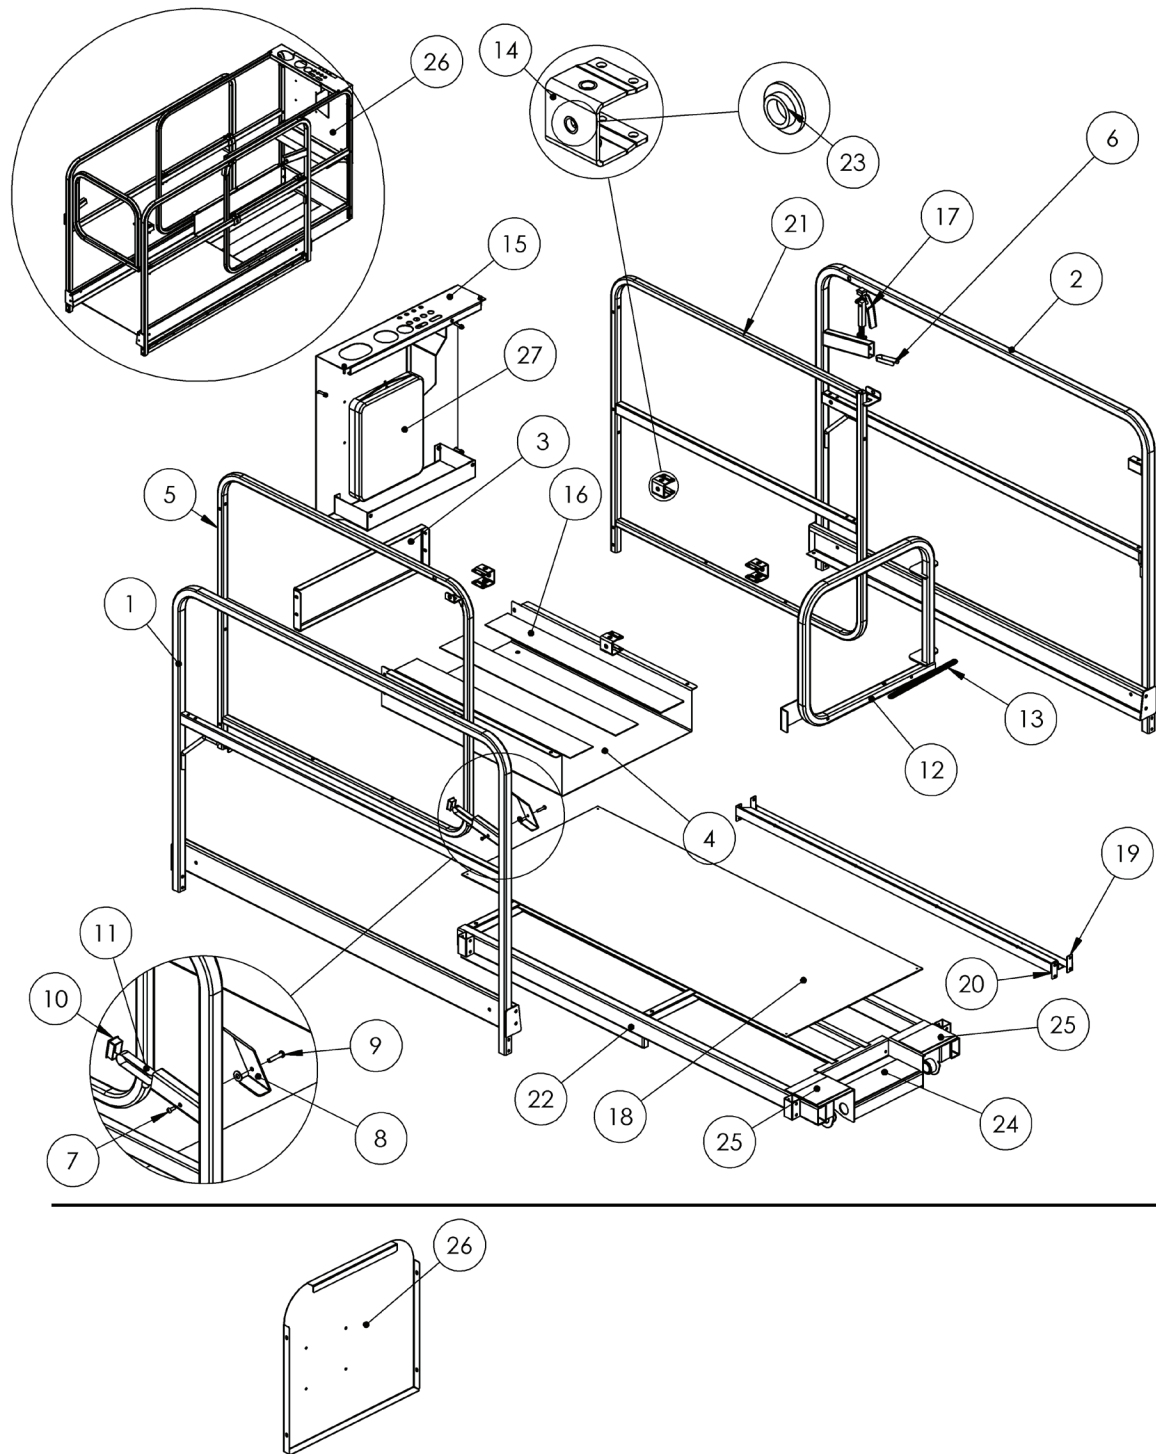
HB-1030/1430 Platform & Rail Parts
